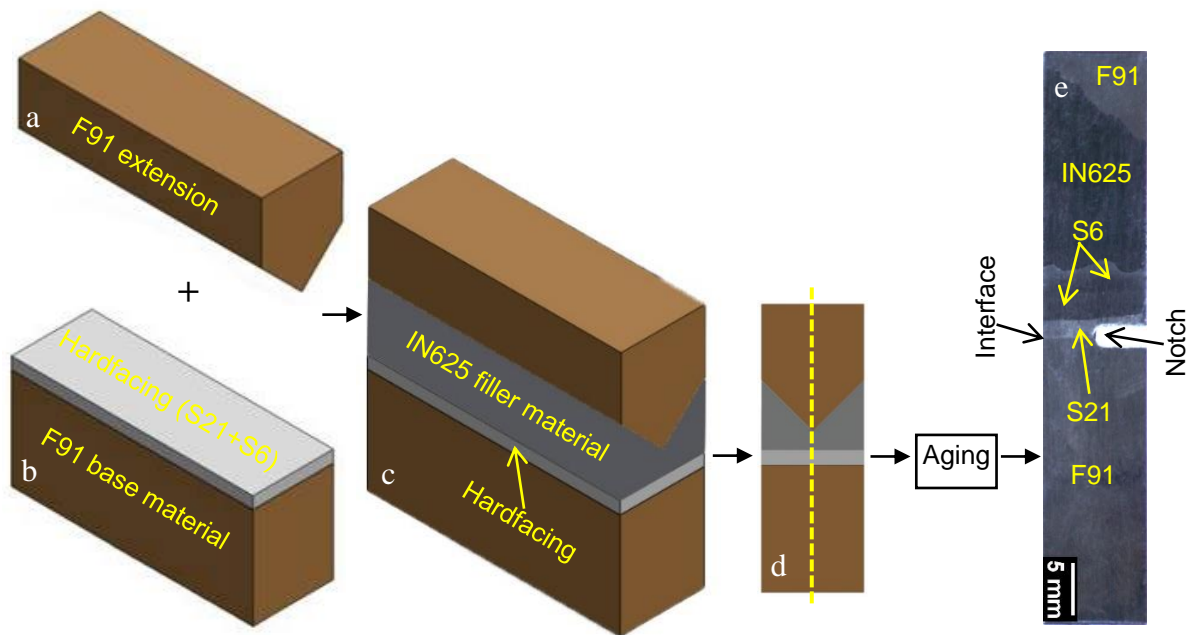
Charpy specimen manufacturing: (a) F91 extension, (b) Stellite-hardfaced coating with buffer layer of S21 and top layer of S6, (c) assembly made by welding an F91 extension to the Stellite-hardfaced coating sample using IN625 as the filler material, (d) bars cut from the assembly, and (e) Charpy U-notch specimen machined from the half bars (cross-section).
